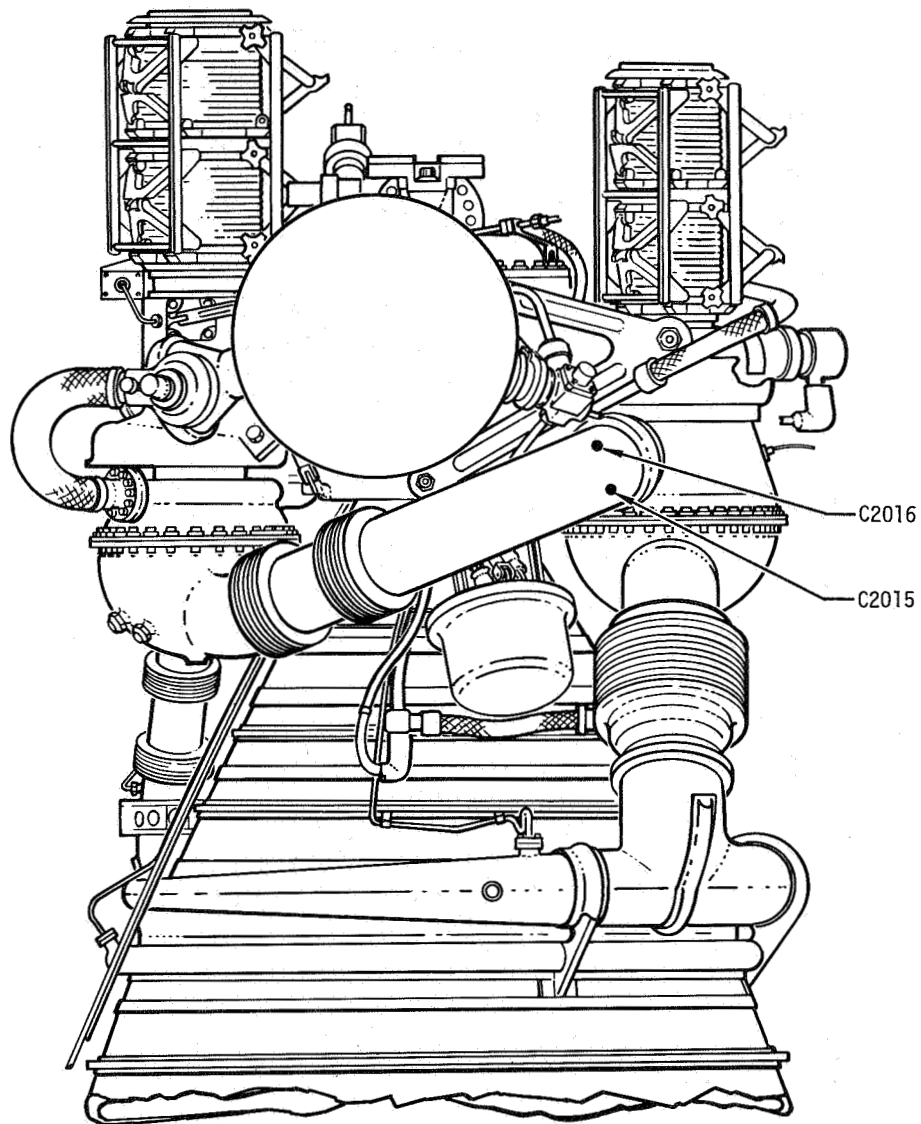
Engine Area Transducer Locations (Sheet 2 of 3)
